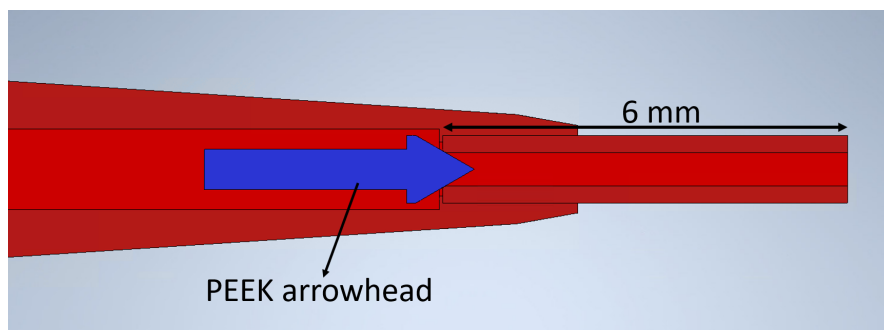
CAD drawing of the PEEK arrowhead along with the nozzle.
